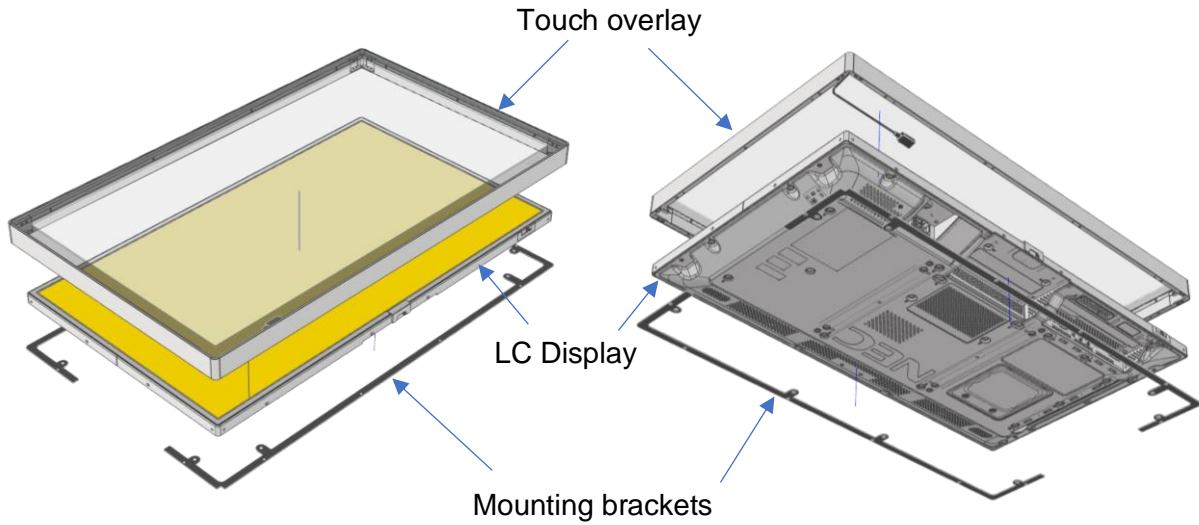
Exemplary exploded view of primeTOUCH flat touch overlay and LC display
